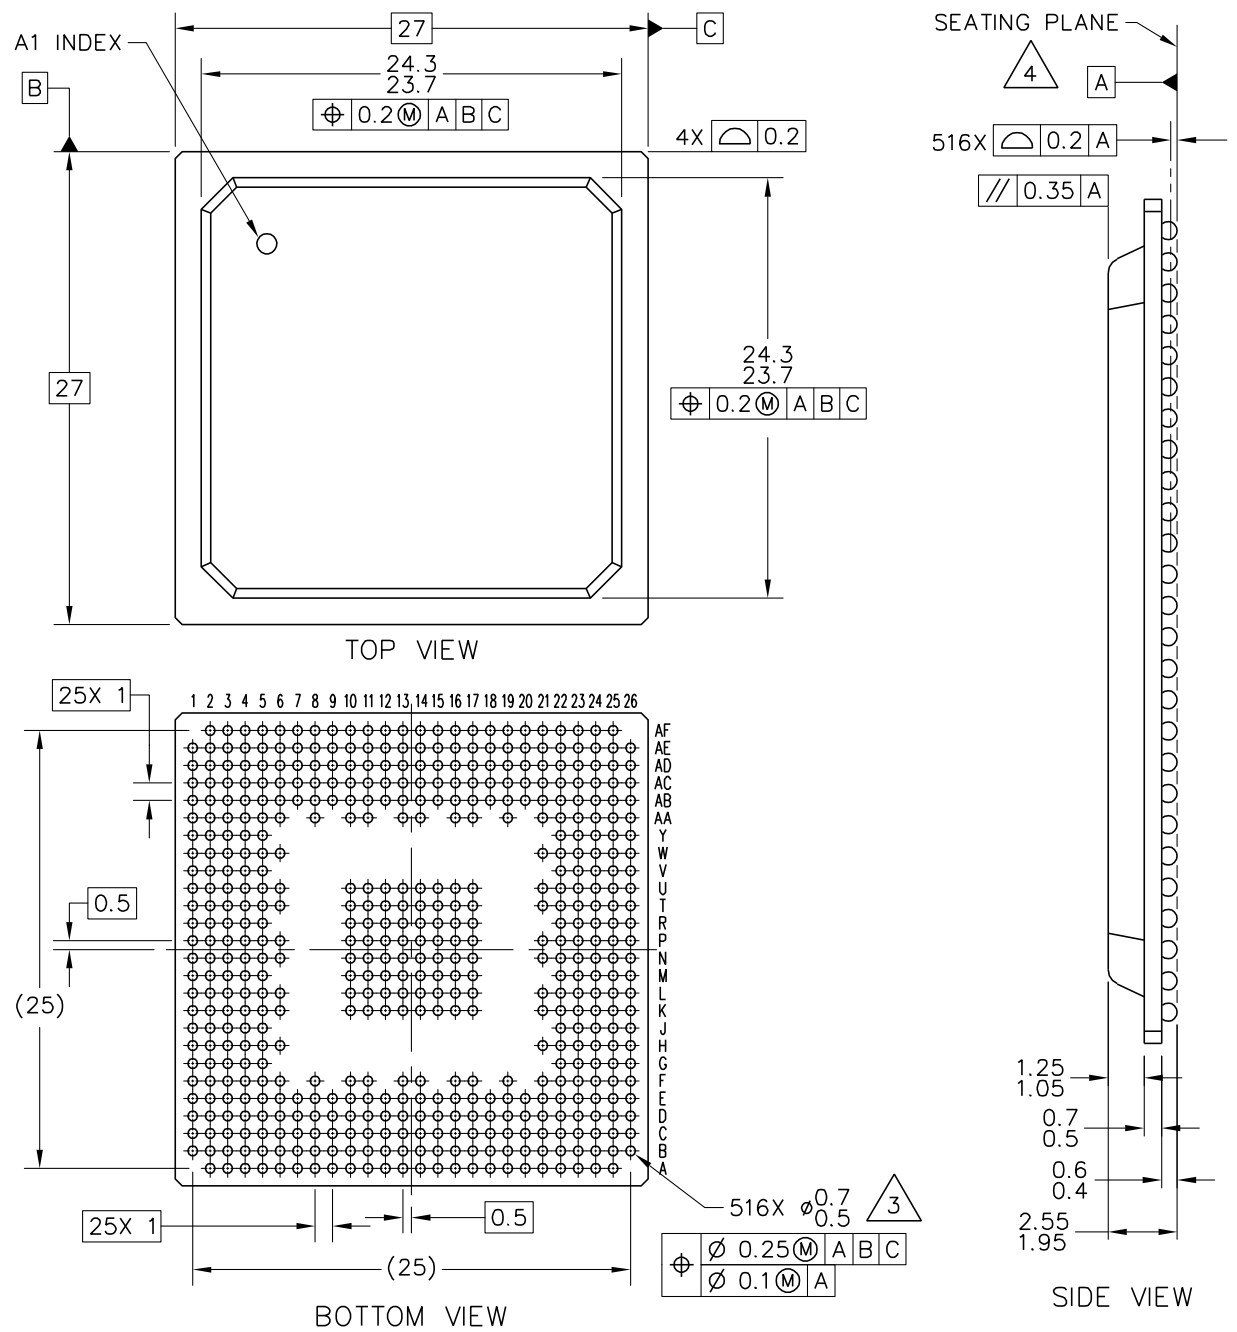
Mechanical Dimensions and Bottom Surface Nomenclature—516 PBGA
